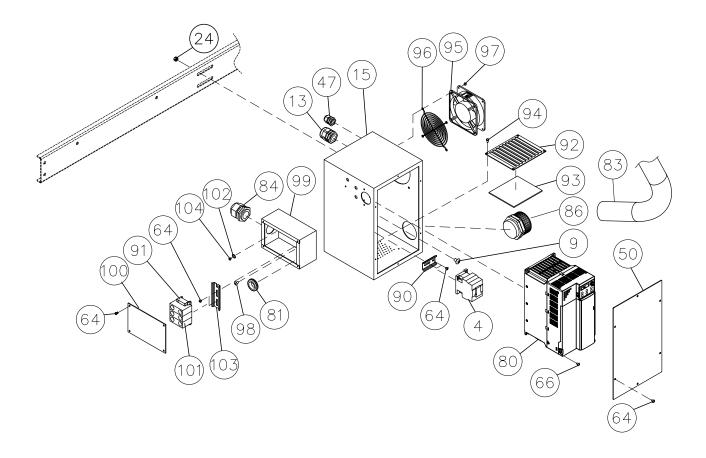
VFD & Power-In Assembly (included with Conveyor parts list)
